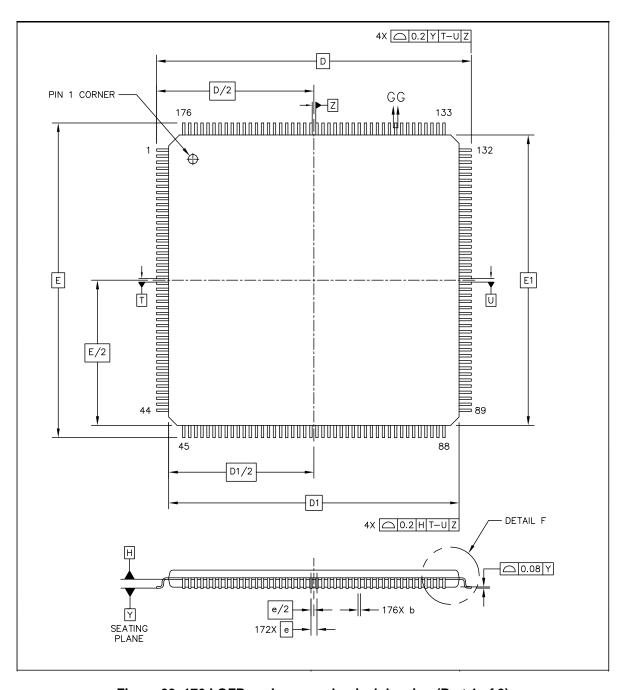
176 LQFP package mechanical drawing (Part 1 of 3)
